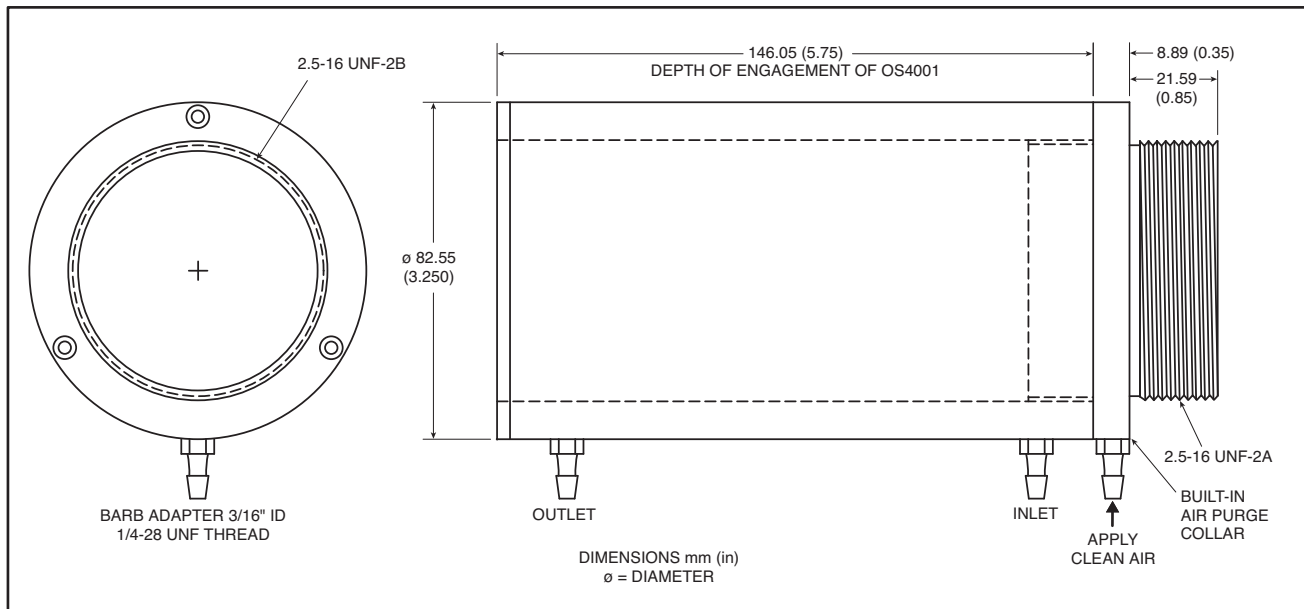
General Dimensions, OS4000-WC Water Cool Jacket
